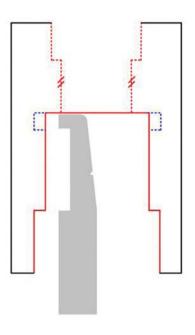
Recess tool's position for cutting the recess to accommodate the grinding mechanism lugs
